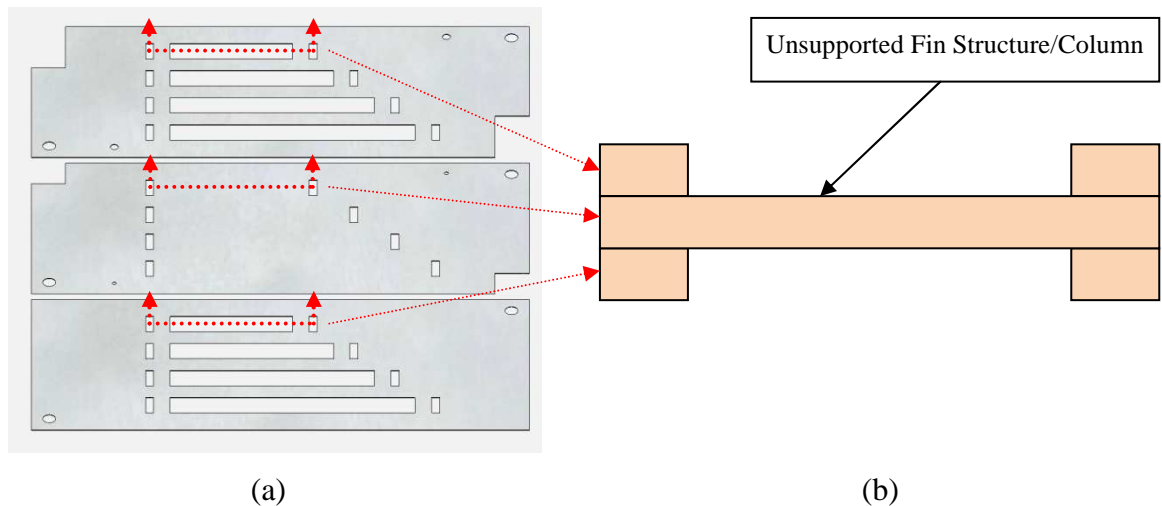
Top view (a) and cross-sectional side view (b) of the preliminary test coupon design.
